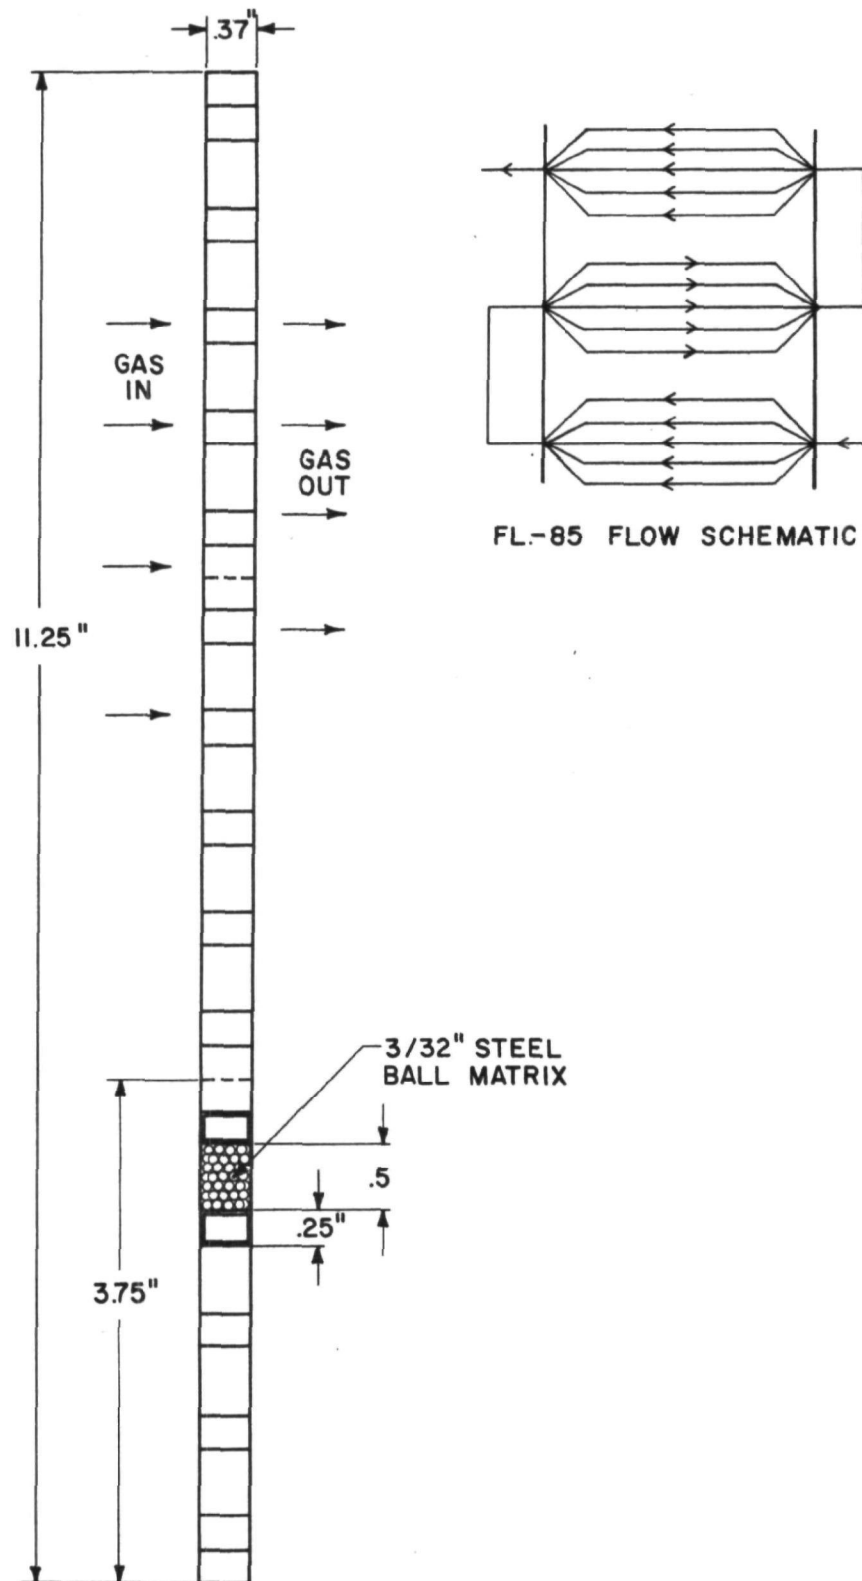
Ball Matrix Section III Stage Boiler Design with 5 Parallel Passes.
